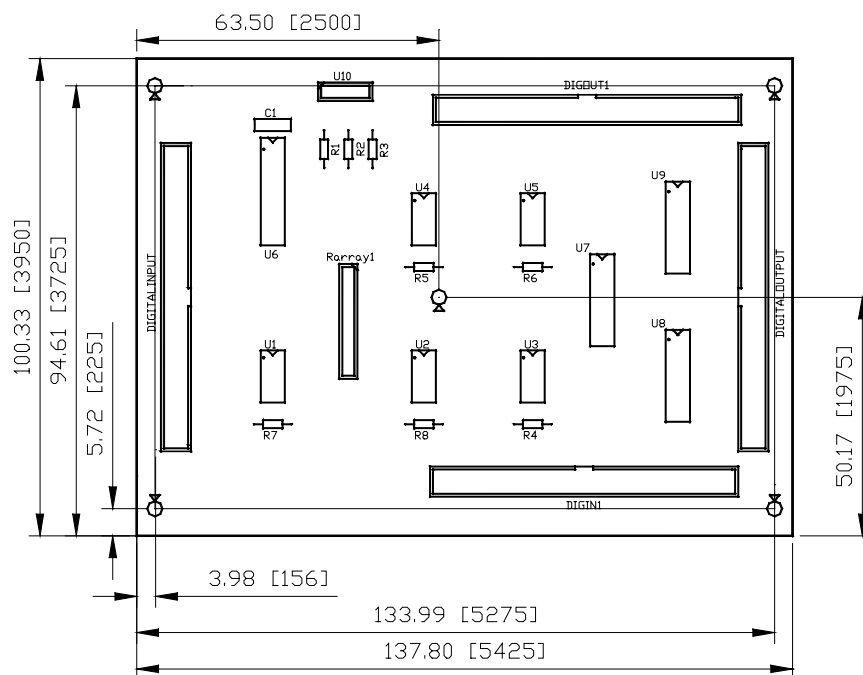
Axis0 Interface Board layout. The measures are in millimeters (mils in brackets).
